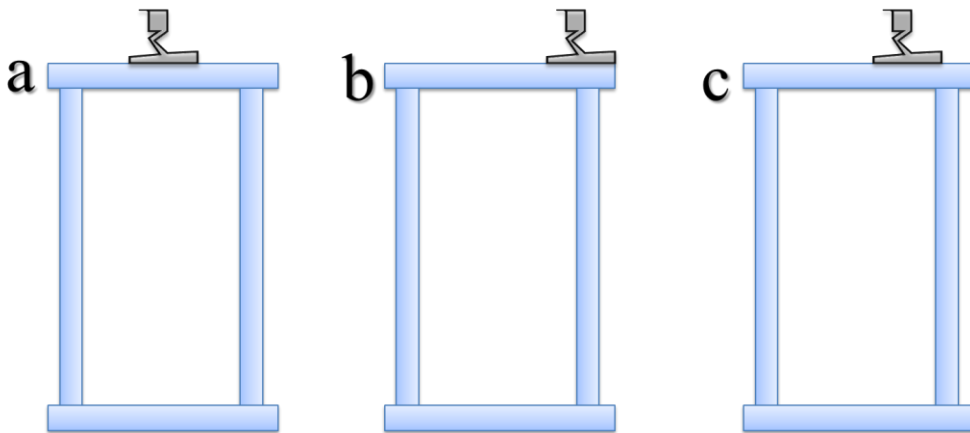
Box bridge structure (a) Middle rail box girder bridge (b) Skew rail box girder bridge (c) Semi skew rail box girder bridge.
